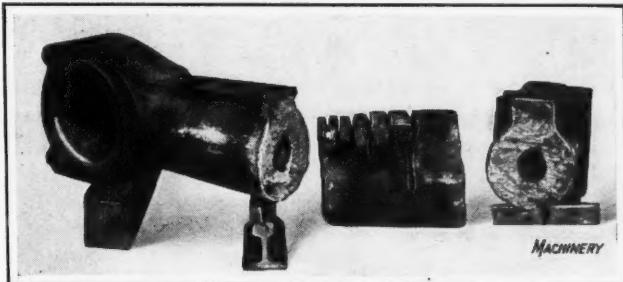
Crank-arm with Section cut out by Oxy-acetylene Torch
